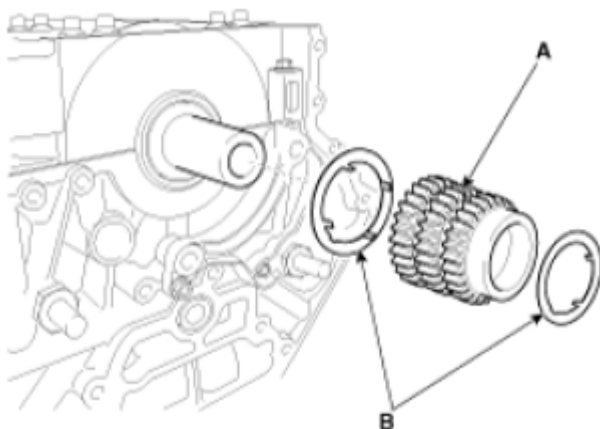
Identifying Crankshaft Sprocket With Friction Plates
